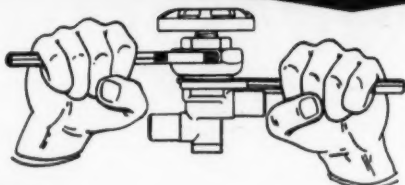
Shows wrenches properly applied to main body and auxiliary body for breaking the joint; the first step in disassembling the valve.
